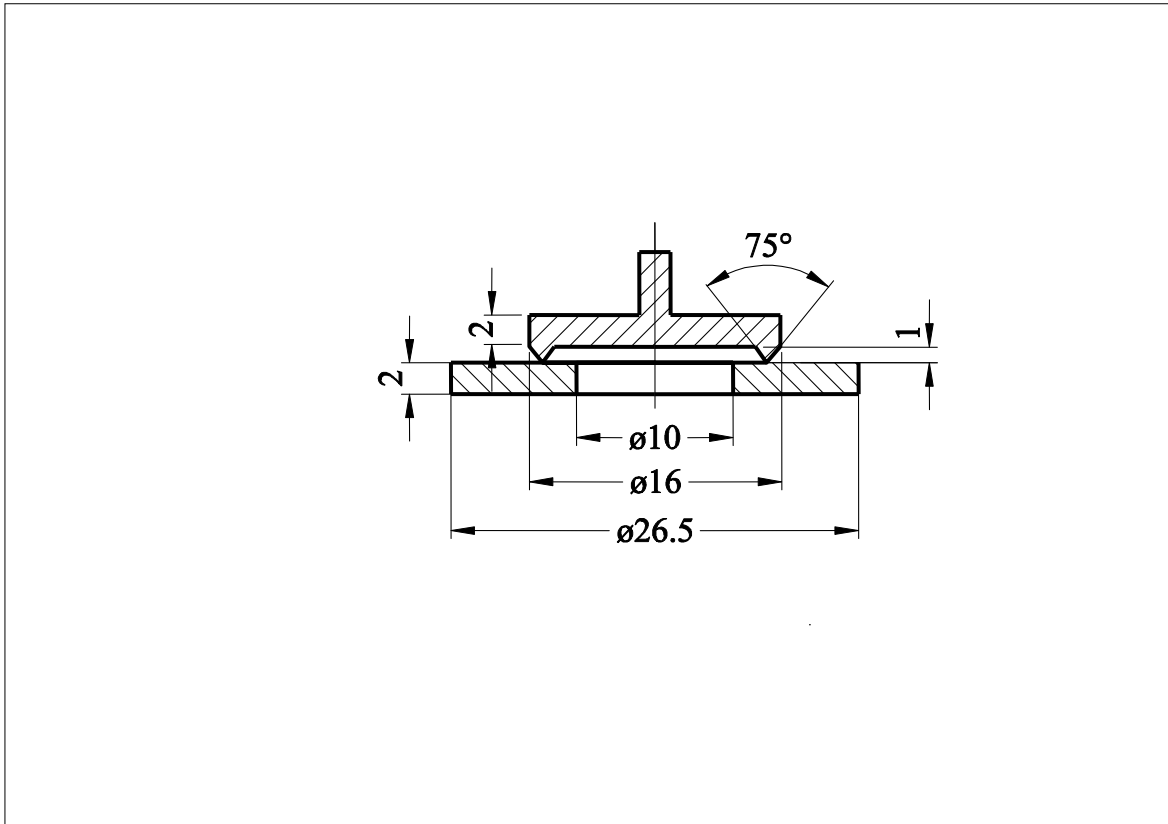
Geometry of projection welding work pieces.
